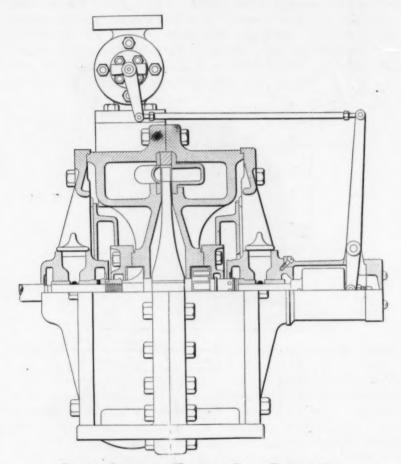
Section of Wilkinson Steam Turbine, 20-in.
